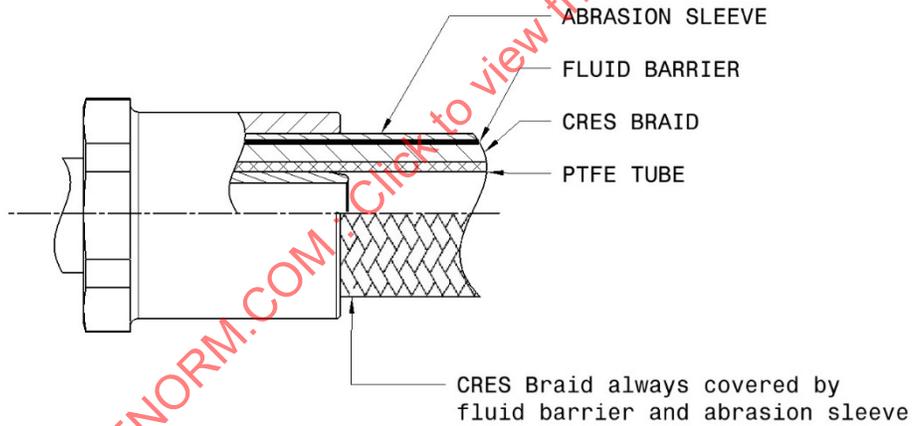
FITTING CAPTURED INTEGRAL ABRASION SLEEVE WITH FLUID BARRIER /28/
